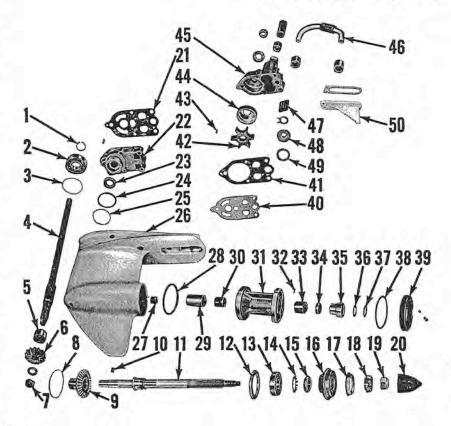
Exploded view of Counter Rotation gearcase and associated parts used on direct reversing models, Illustrated is Merc 800 unit. Refer also to Fig. M104.
